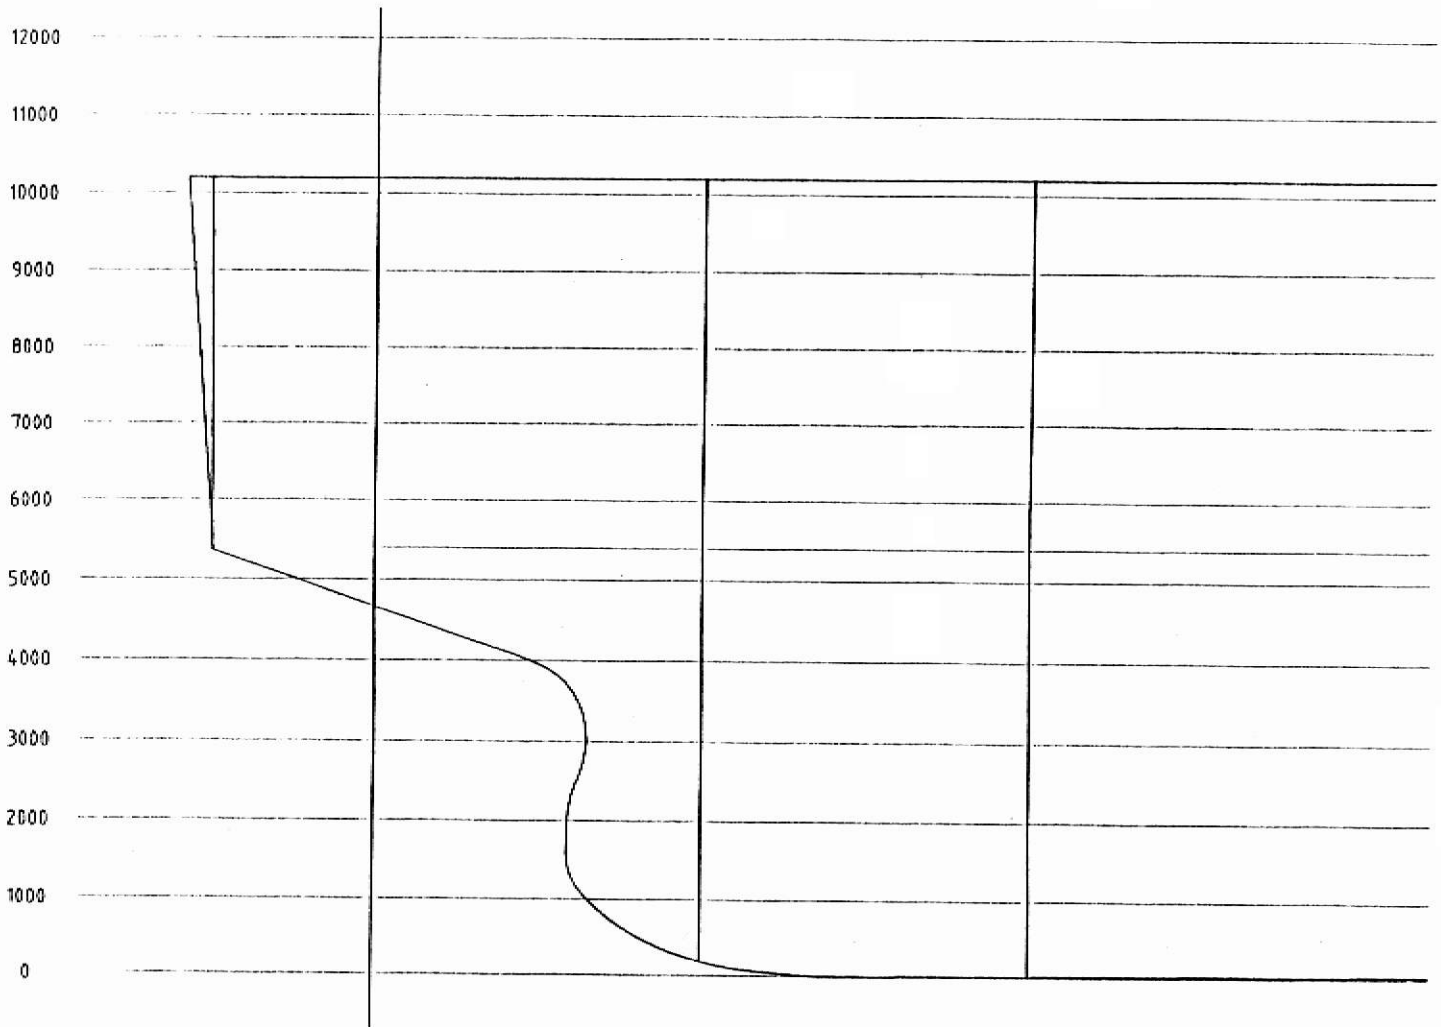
Profile Plan. (XZ plane intersection (AFT)) - Scale : 1/100)
